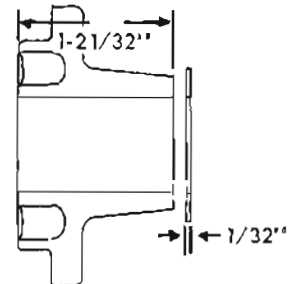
Thrust Washer B-12-31013 with Thrust Hub Assembly B-35964A1
